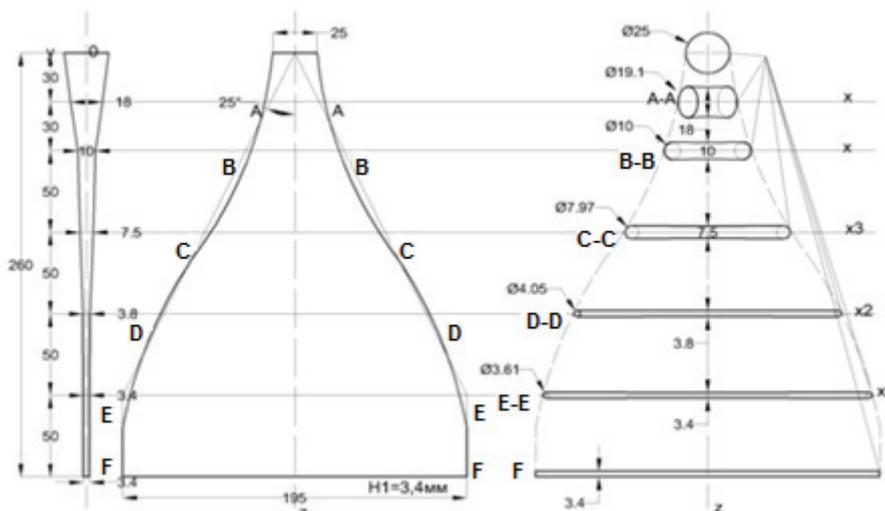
Operating channel surface embossing (the extruded material cross-section area along the head length z is constant)
